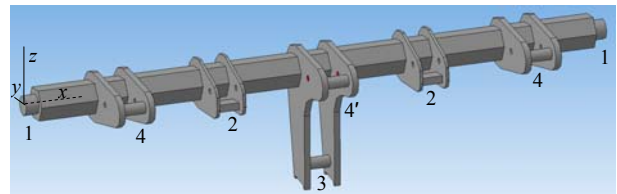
Circuit breaker's drive shaft, where 1 – shaft mount axes in bearings; 2 – planes of force application of OFF springs; 3 – electromagnetic actuator's rod mounting axis; 4, 4' – moving contacts' rod mounting axes in the end and medium poles; x, y, z – coordinate system axes
